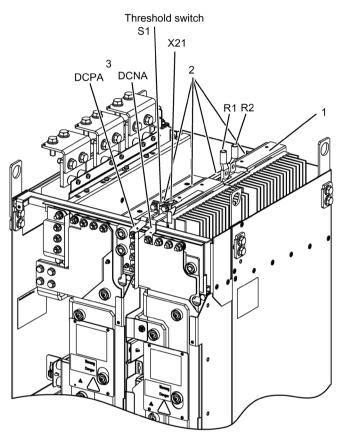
Installing the Braking Module in a Smart Line Module / Active Line Module / Motor Module, frame size HX
